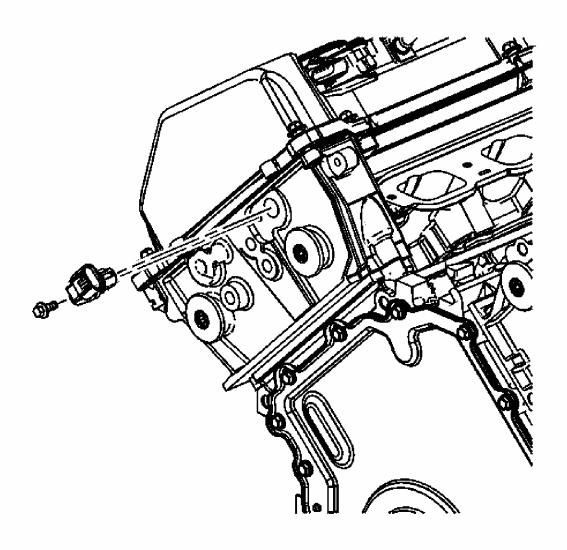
Identifying CMP Sensor Courtesy of GENERAL MOTORS CORP.
